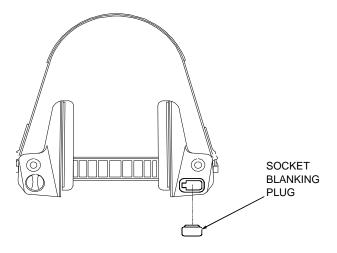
Socket Blanking Plug (CAPS Type 1)
